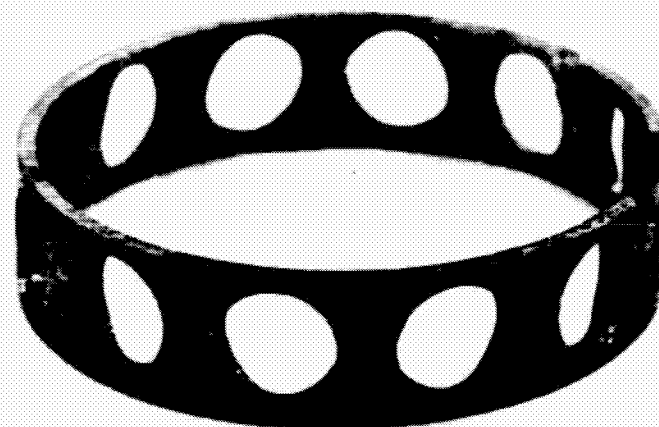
Posttest Appearance of Irradiated PBI-Glass Ball Retainer, Showing Outside Surface and Ball-Pocket Scars
